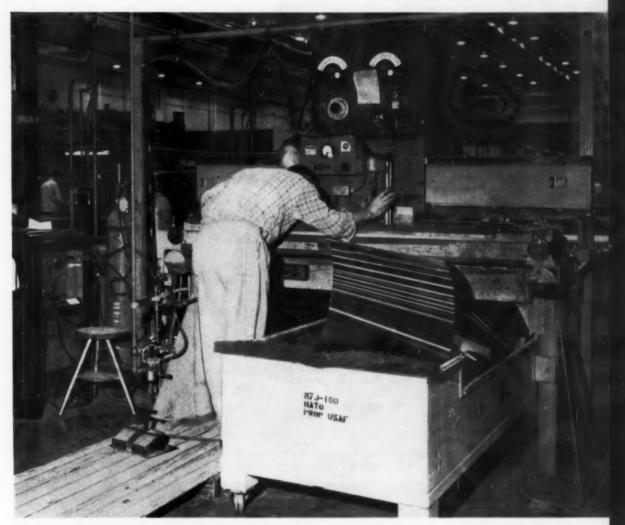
The Ends of Each Segment Are Butt Welded (Heliarc) in This Welder. Butt welds have been made in stainless sheet 0.005 to 0.050 in. thick
